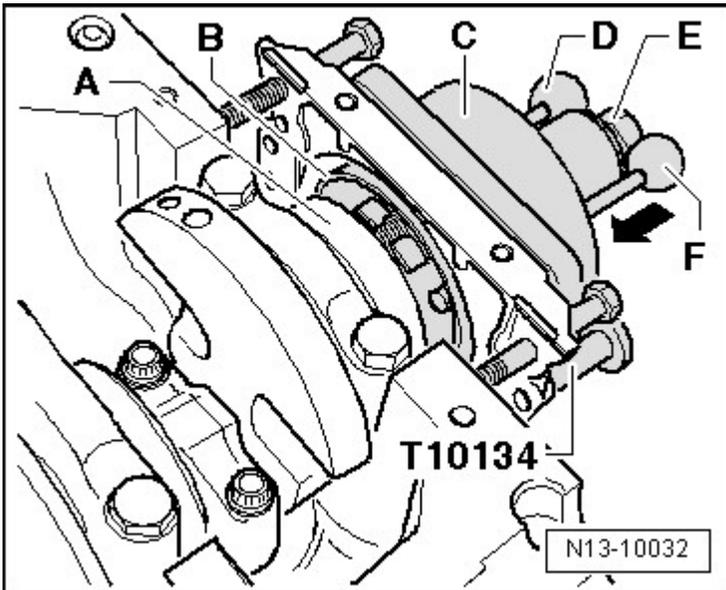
Identifying Assembly Bell Pushed Until Sealing Lip Support Ring Rests On Crankshaft Flange
